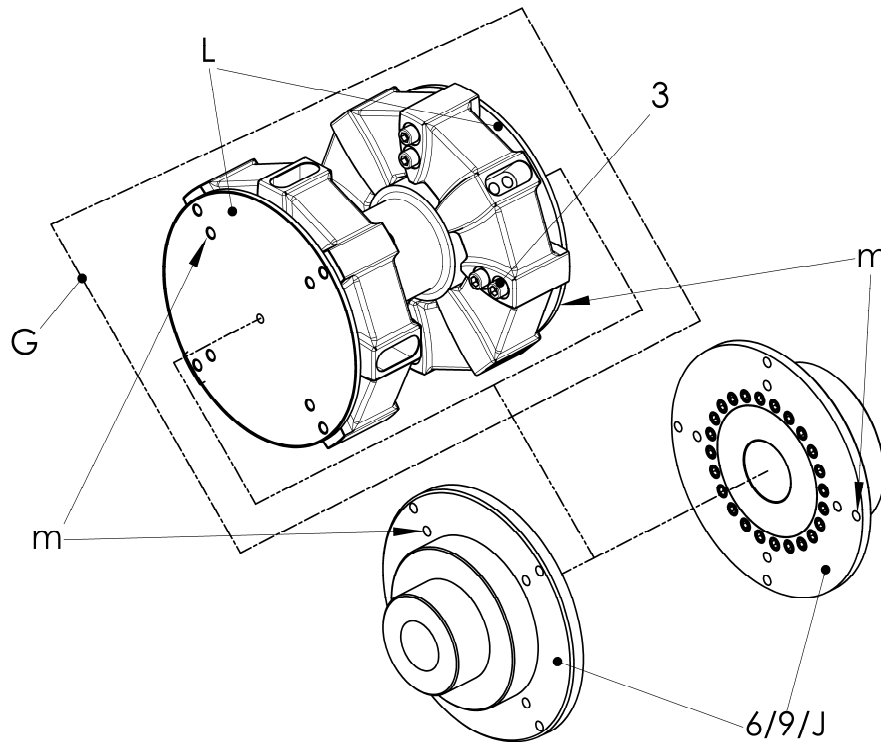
Positioning the pre-mounted assembly (type GB)
